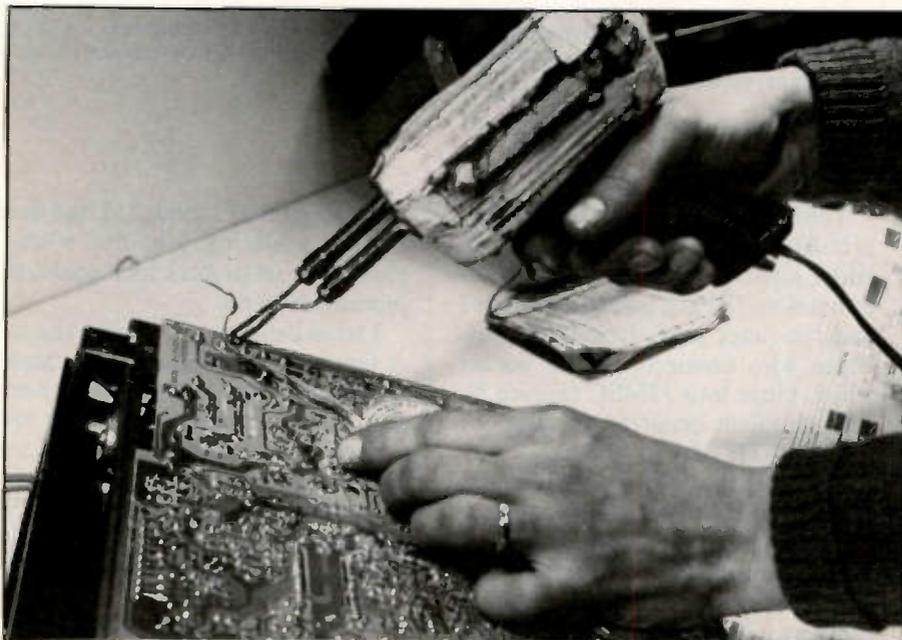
Before the defective flyback can be replaced, all solder from the 12 eyelets must be removed. Likewise, when a new transformer is replaced, fill up the metal eyelets with solder.
